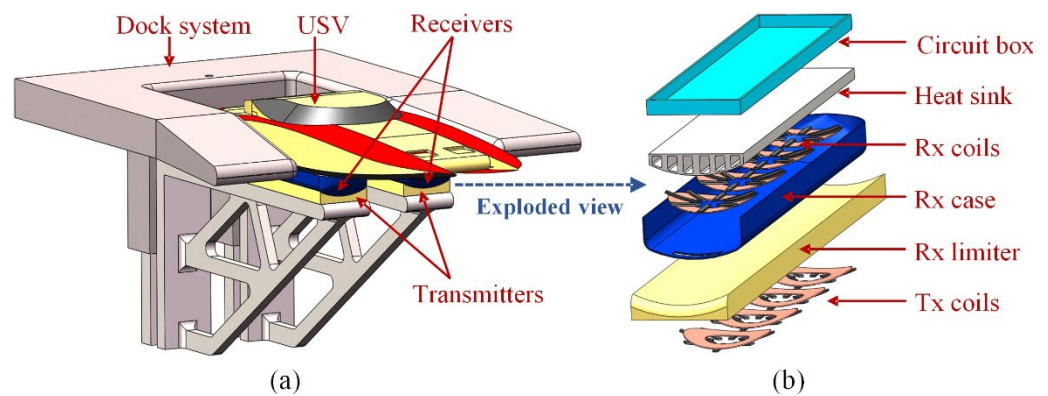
Overview of UWCS. (a) Assembly of a transmitter in dock system and receiver in USV. (b) Exploded view of transmitter and receiver.
